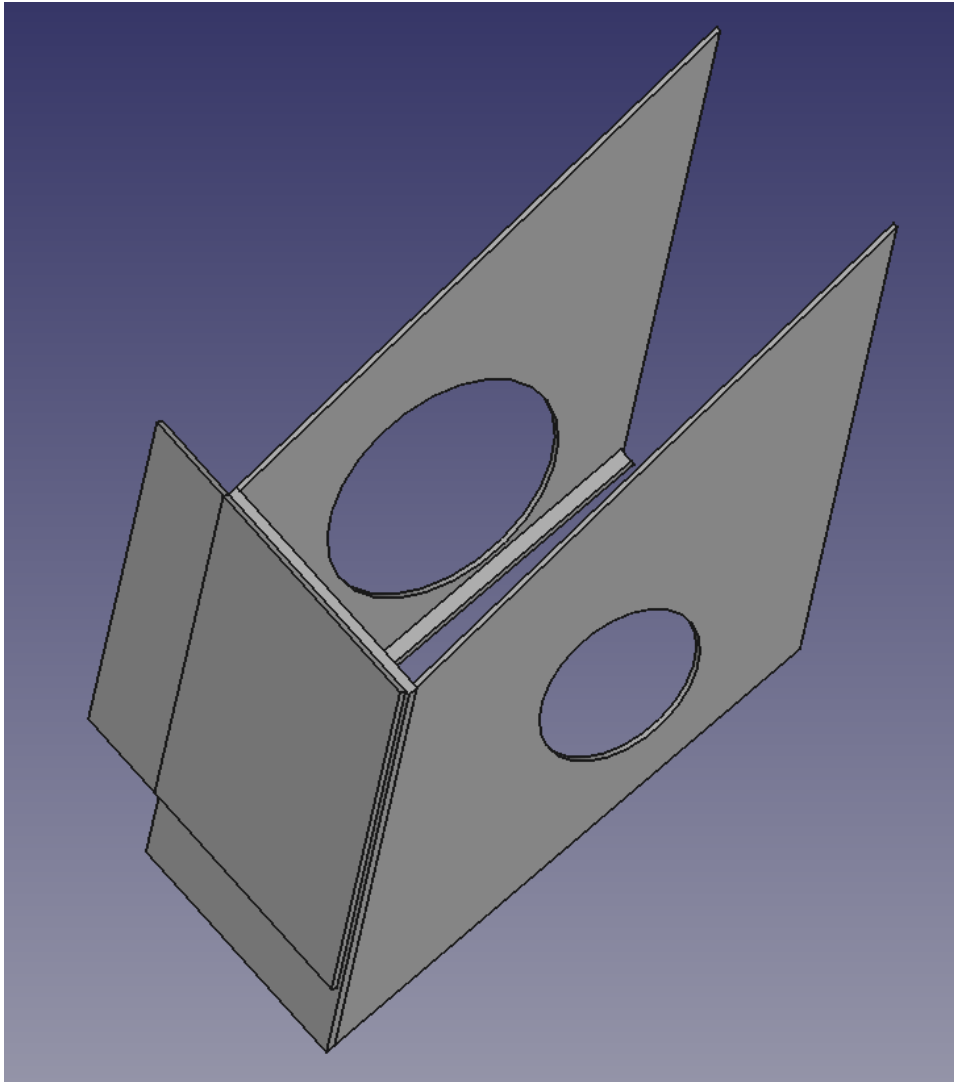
Design of the bracket for mounting the motor. Designed in FreeCad.
